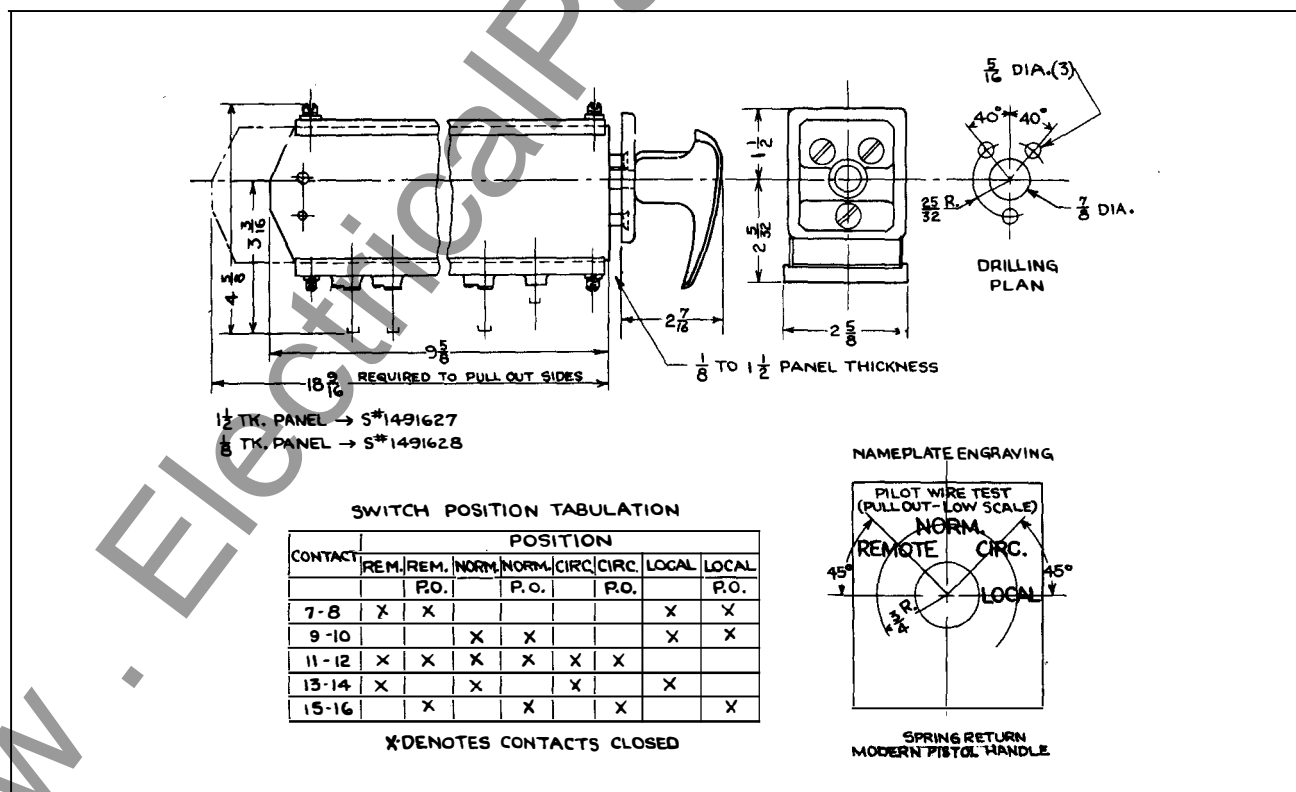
Outline and Drilling Plan of the Type W Test Switch. For Reference Only.
